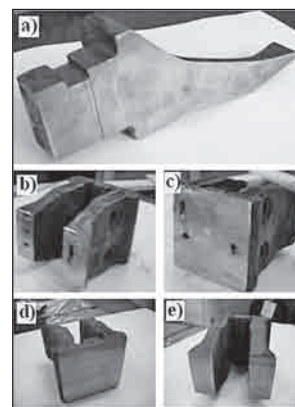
Cross-section of the casting a) cutting edge b,c) steady holder with missing riser d,e) steady holder with complete set of risers
